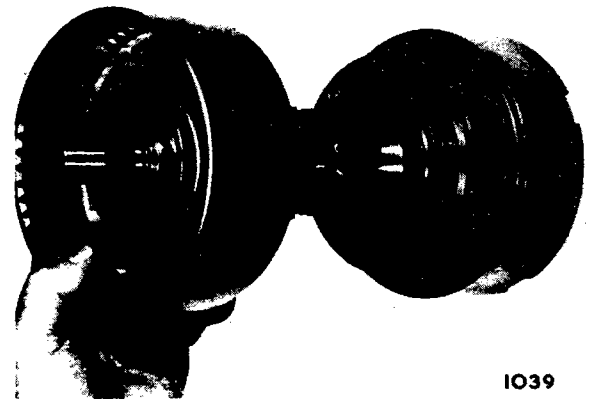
Fitting the rear clutch piston sealing ring
